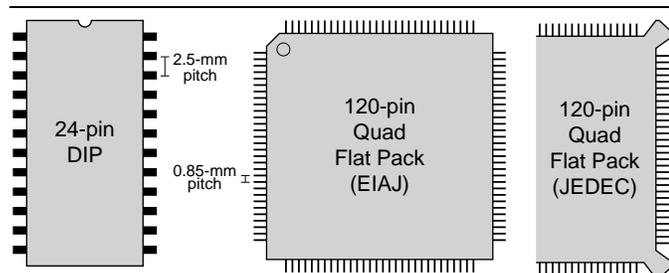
A quad flat pack can have many more pins than a DIP due to its smaller pin spacing. The JEDEC package differs from the EIAJ standard due to its corners. (Parts are approximately actual size.)
